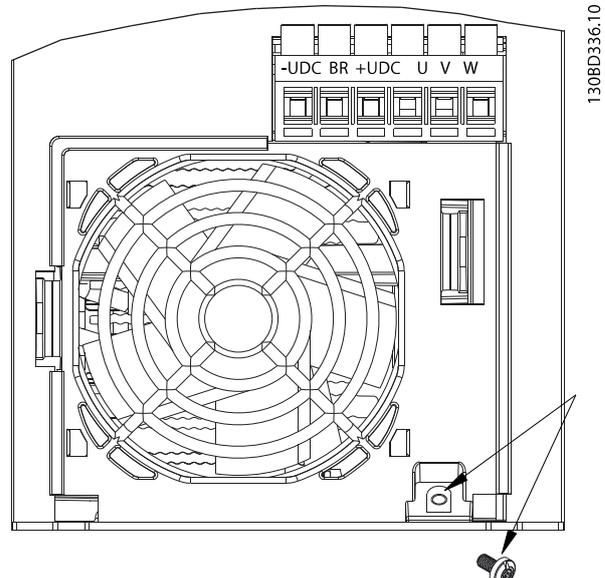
Removing Fan Screw on Enclosure Type J3
